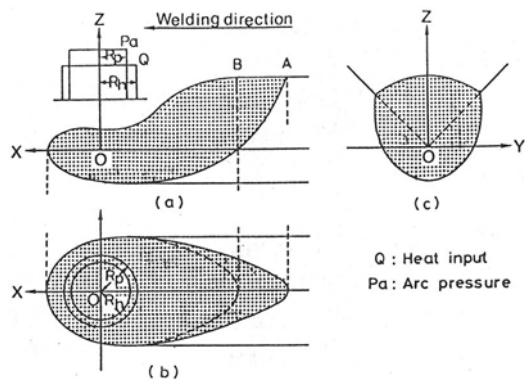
Model of molten pool for fillet welding (Model II)
